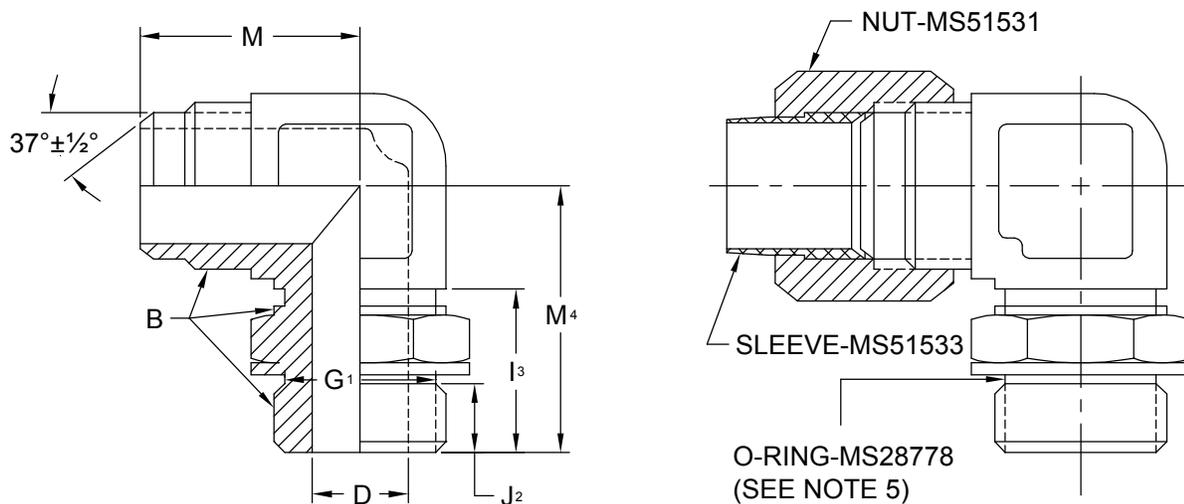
Elbow, tube to boss, 90 degree, o-ring, flared.
